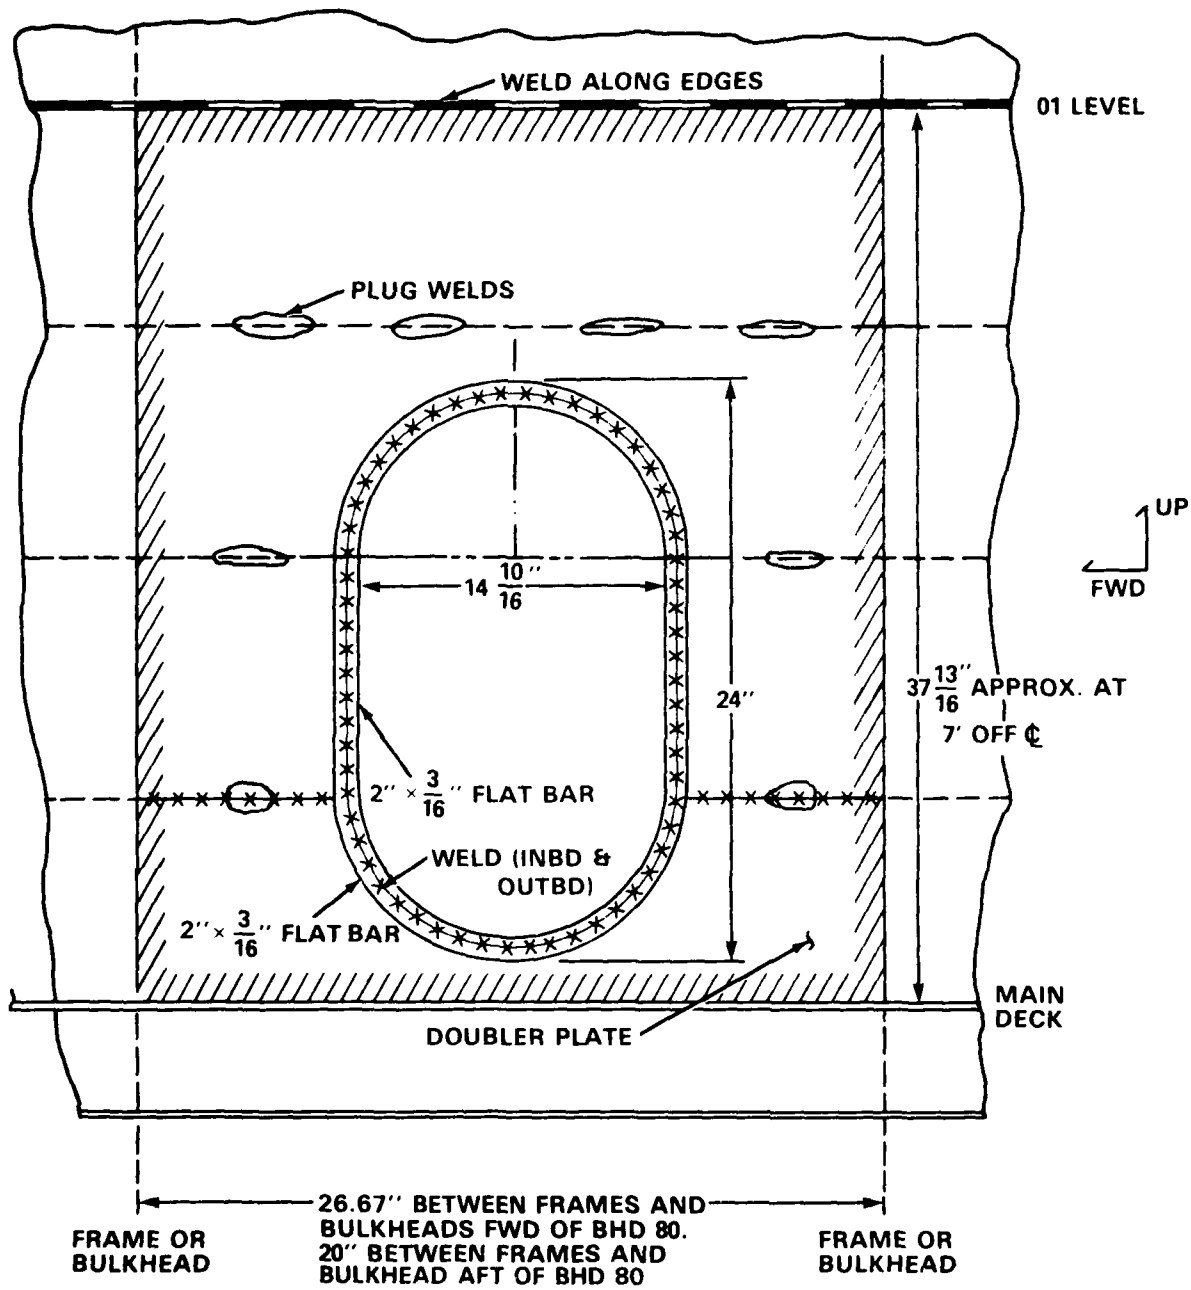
Typical Deckhouse Side Access Hatch Opening after Structural Modification
